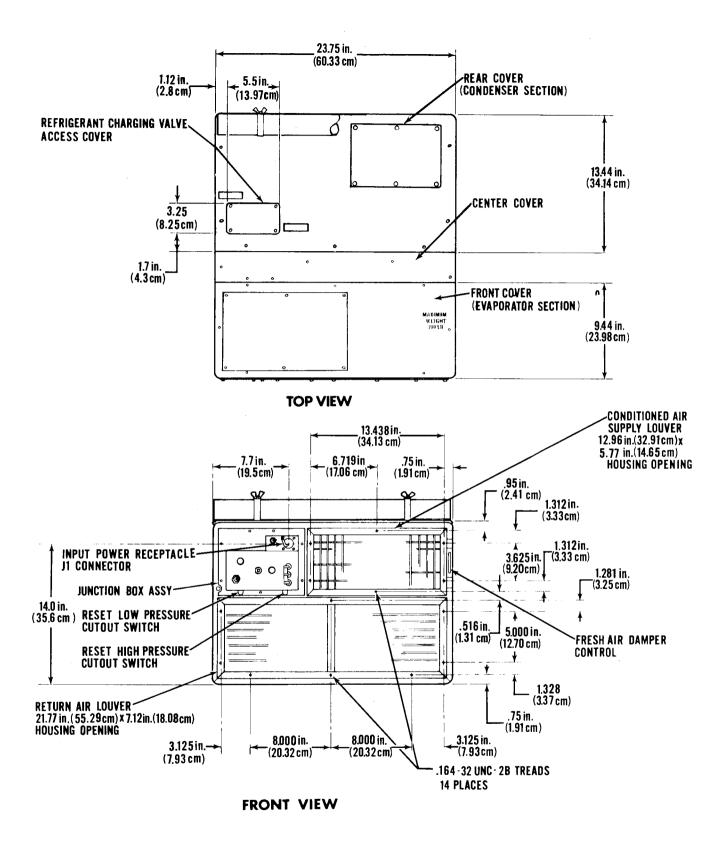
Installation Dimensions (Sheet 1 of 3)
